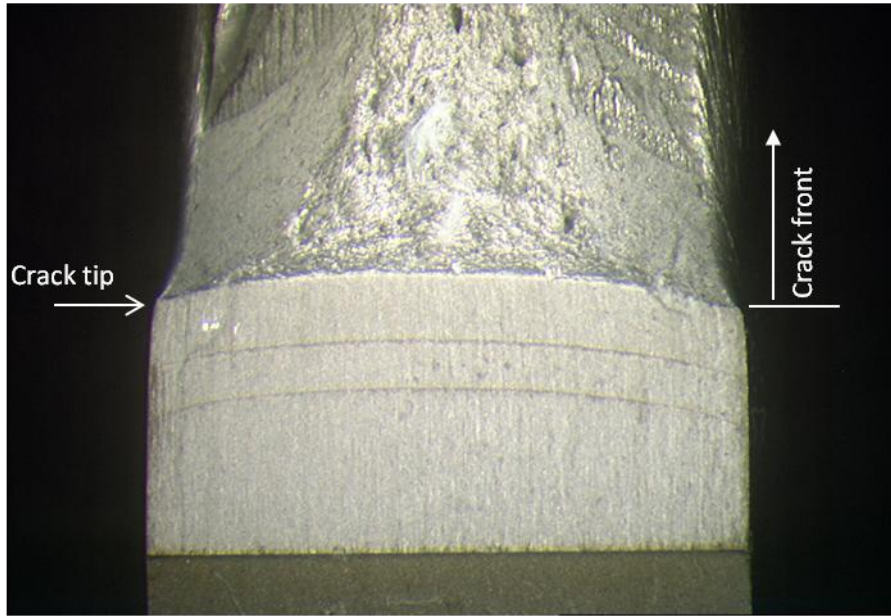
The cross section of a fatigued pre-cracked specimen
